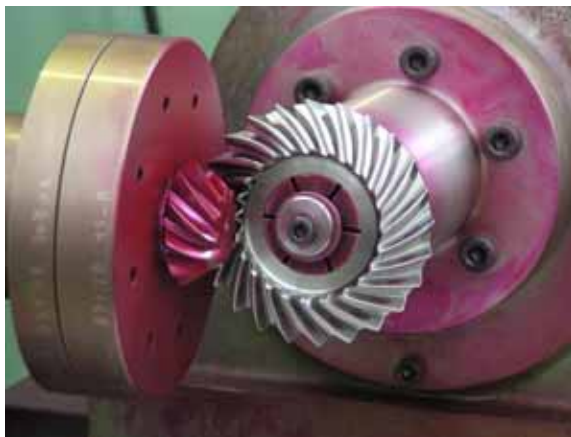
Tested contact mark on the tooth surfaces of master pinion and gear .
